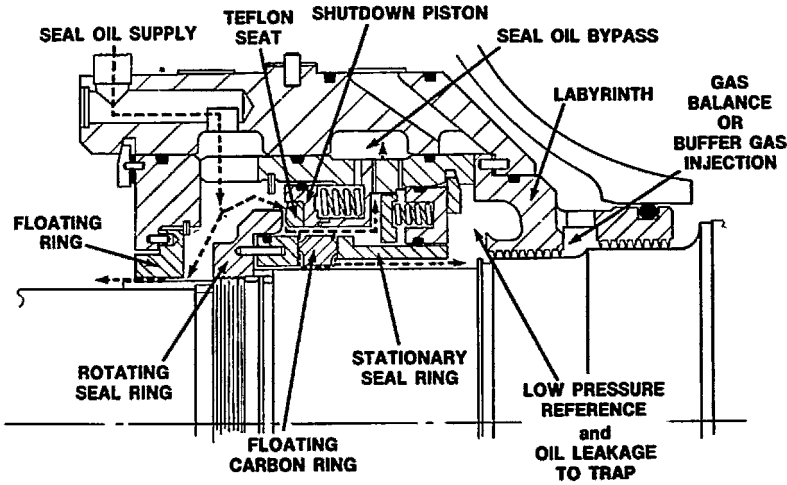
Mechanical contact seals. (Dresser-Rand Company, Olean, N.Y.)
